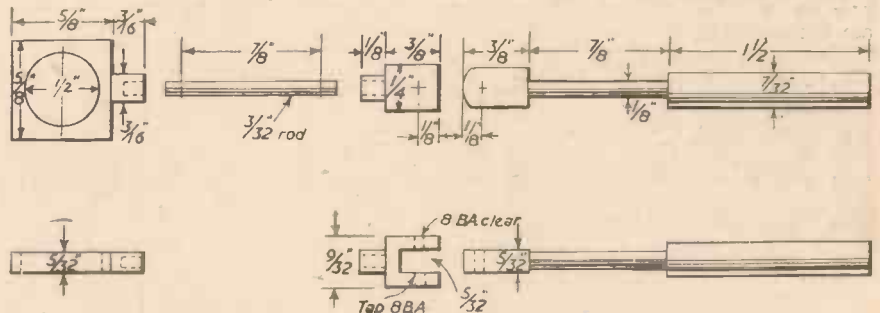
Details of valve gear, eccentric rod and valve slide.
